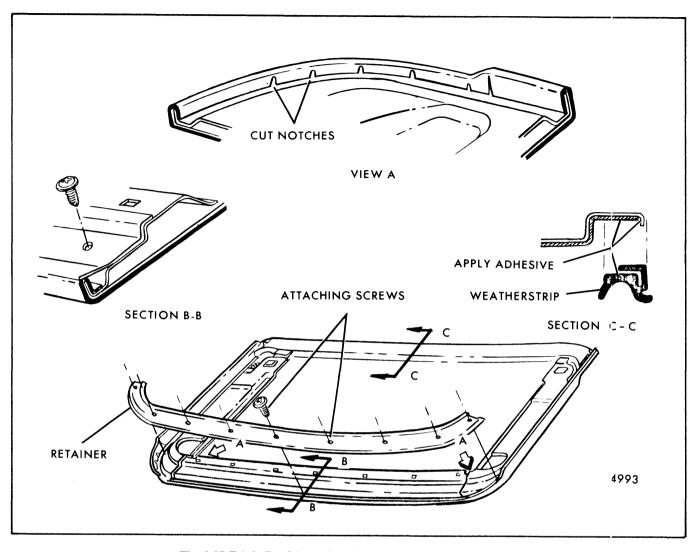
Fabric Roof Cover Installation on Sliding Sunroof Panel
